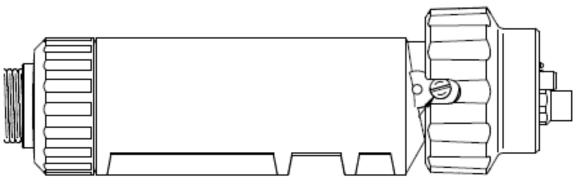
GUN END FCAW HYPERFILL GUNS Lincoln & Fast Mate Connector
